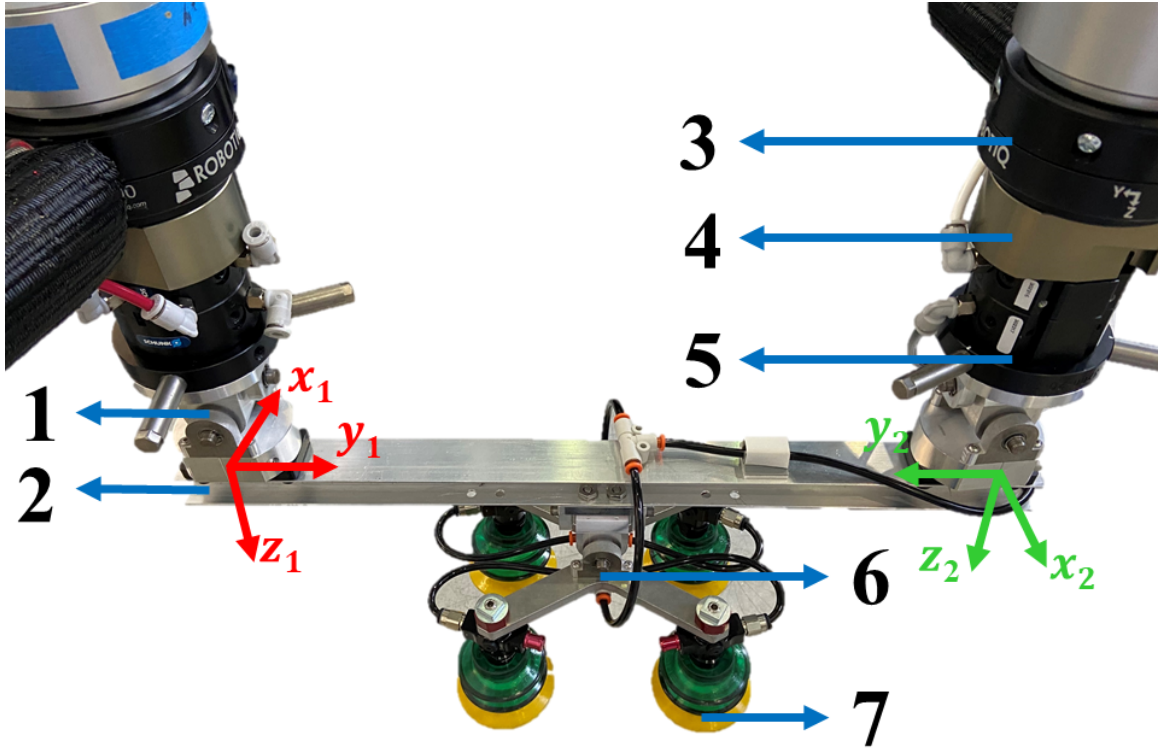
Annotated view of the fully designed and machined prototype of the dual-arm whiffletree gripper: 1) passive joint, 2) Robotiq Force-Torque Sensor, 3) Master Plate, 4) Tool Plate, 5) I-beam linkage, 6) center joint, 7) pneumatic grippers.
